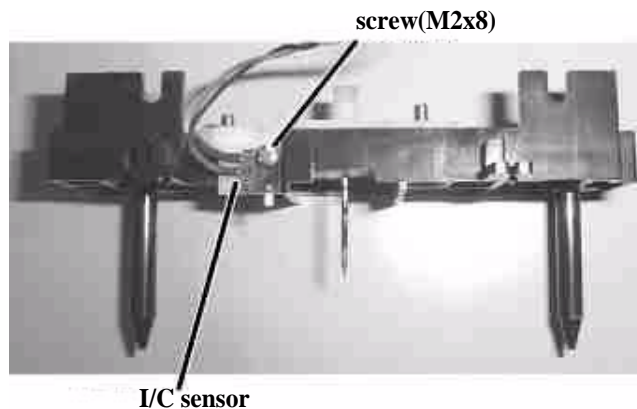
Removing the Ink Sensor Assembly 2/3
